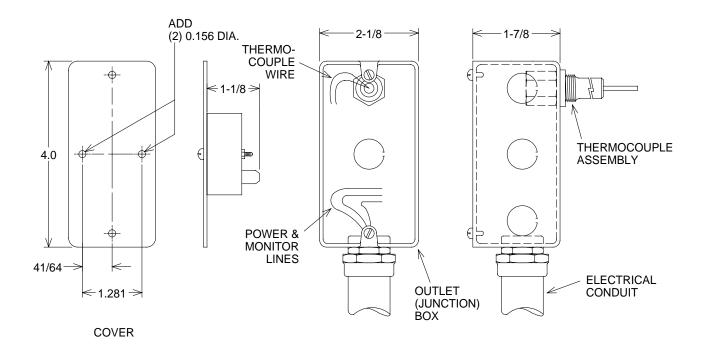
Assembly of the 18-811 Transmitter inside a junction box
